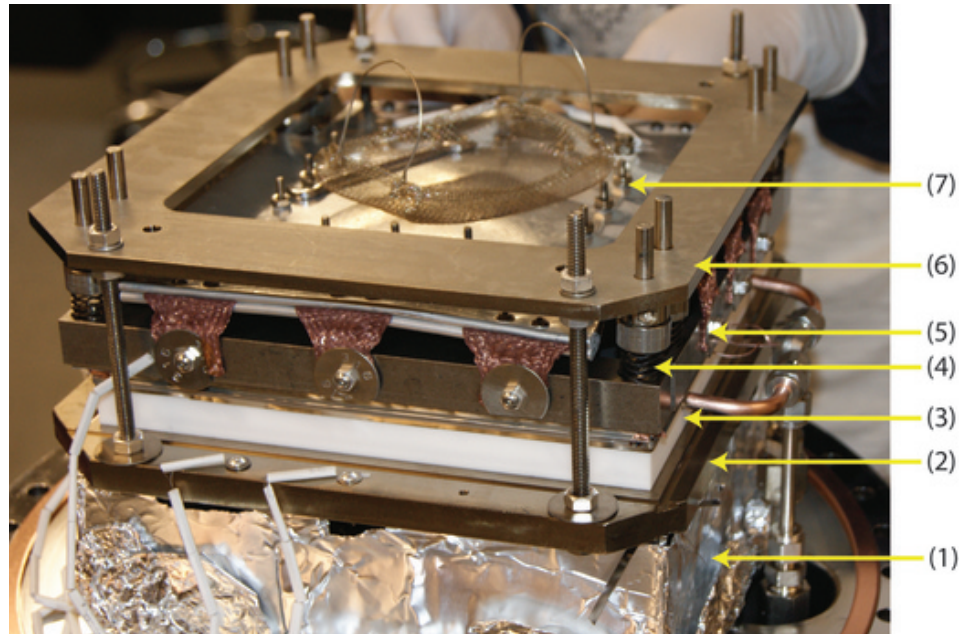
An assembled tile clamped in place in the compression fixture prior to sealing. Heaters above and below the tile couple to the top and bottom fixture plates. The indicated components are: (1) the lower NiCr heater assembly; (2) the bottom compression fixture plate; (3) the tile assembly; (4) the compression mechanism; (5) floating rigid press bars; (6) the upper compression fixture plate; and (7) the upper NiCr heater assembly.
